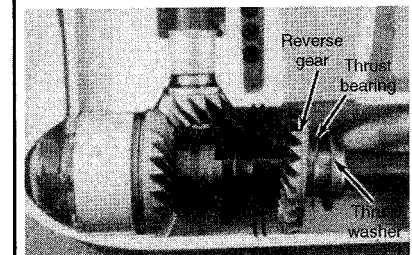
Cut-away view showing the thrust washer, thrust bearing and reverse gear
